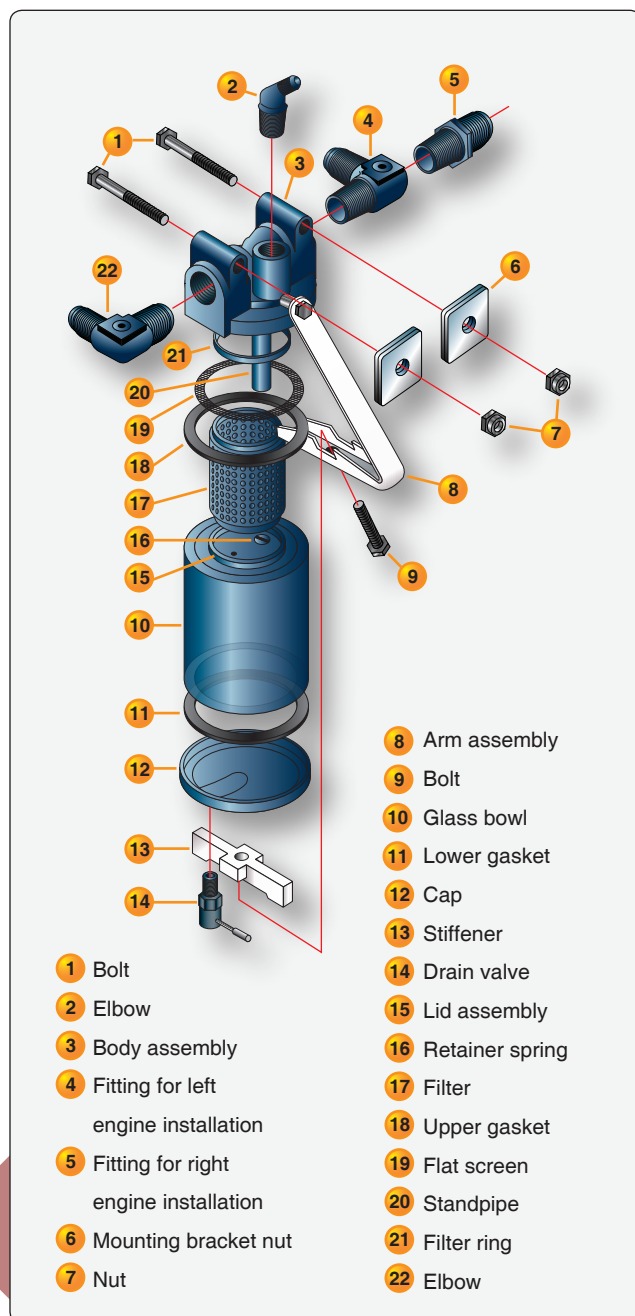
A filter assembly on a light twin reciprocating-engine aircraft.
